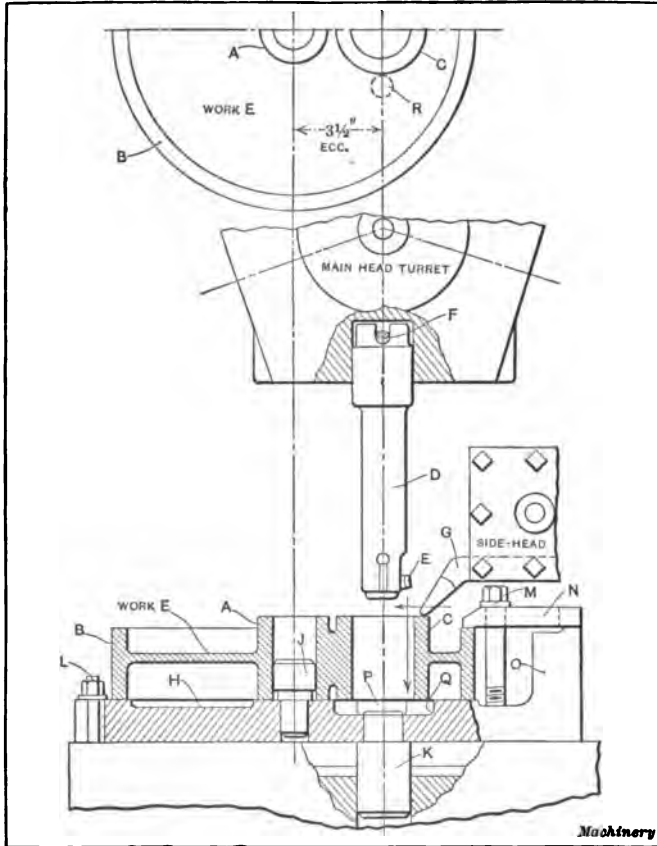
Method of Machining Eccentric Hub on Vertical Turret Lathe
